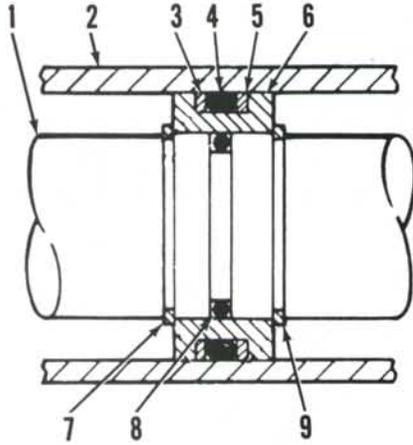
Diagram showing correct placement of "O" rings and backup rings on piston and rod of steering cylinder used on David Brown front drive axles.
